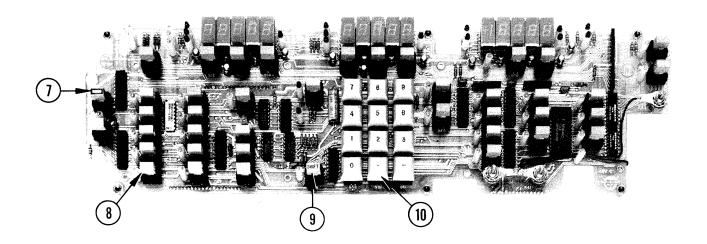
A15 Front Panel Assembly (Sheet 2 of 2)
